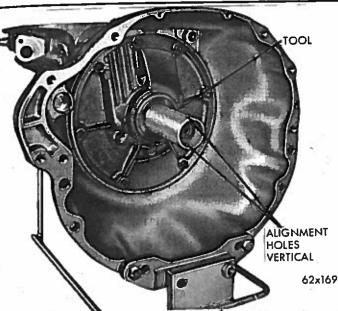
Aligning Front Pump Rotors (Tool C-3881)
